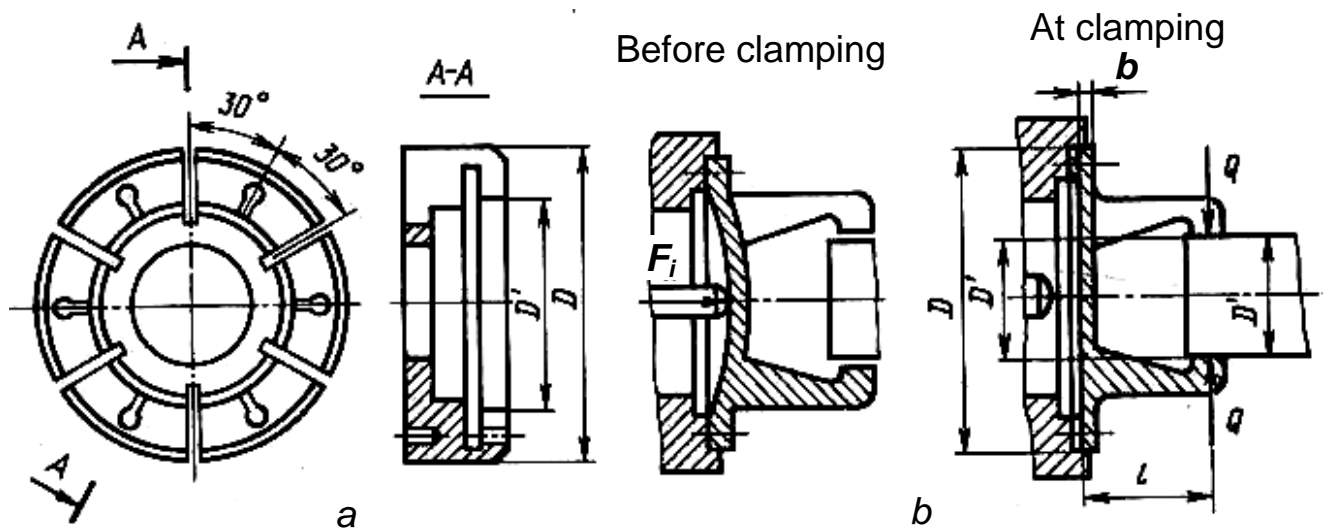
Diaphragms: a – cup-shaped; b – horn-type
